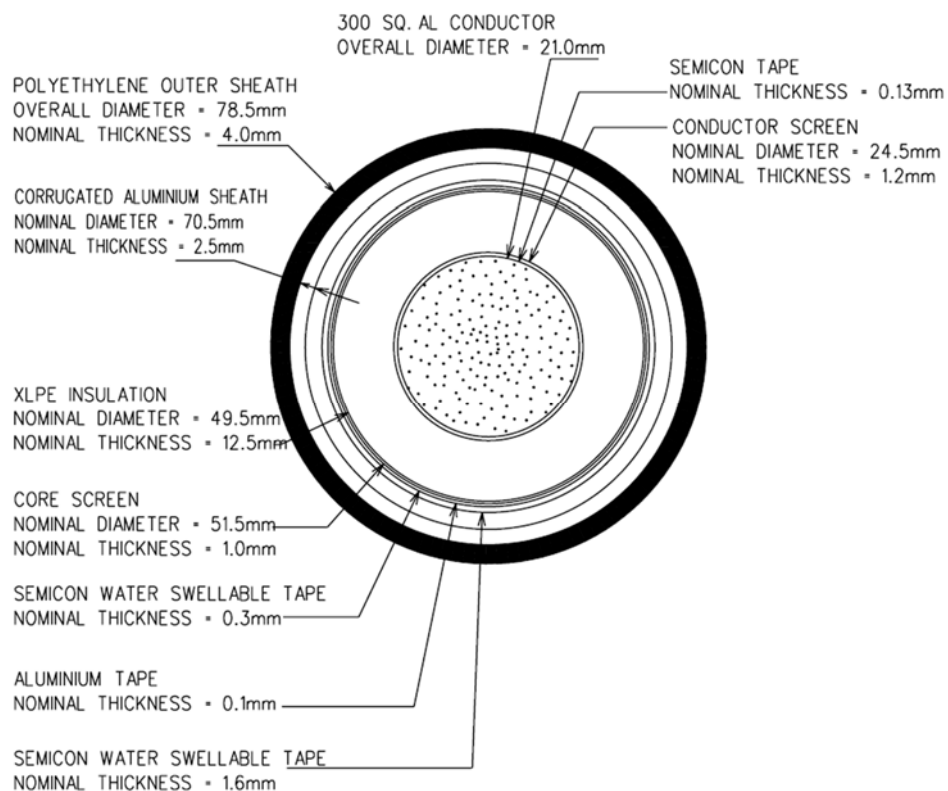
66kV, XLPE, Single-core cable cross-sectional view [131]
